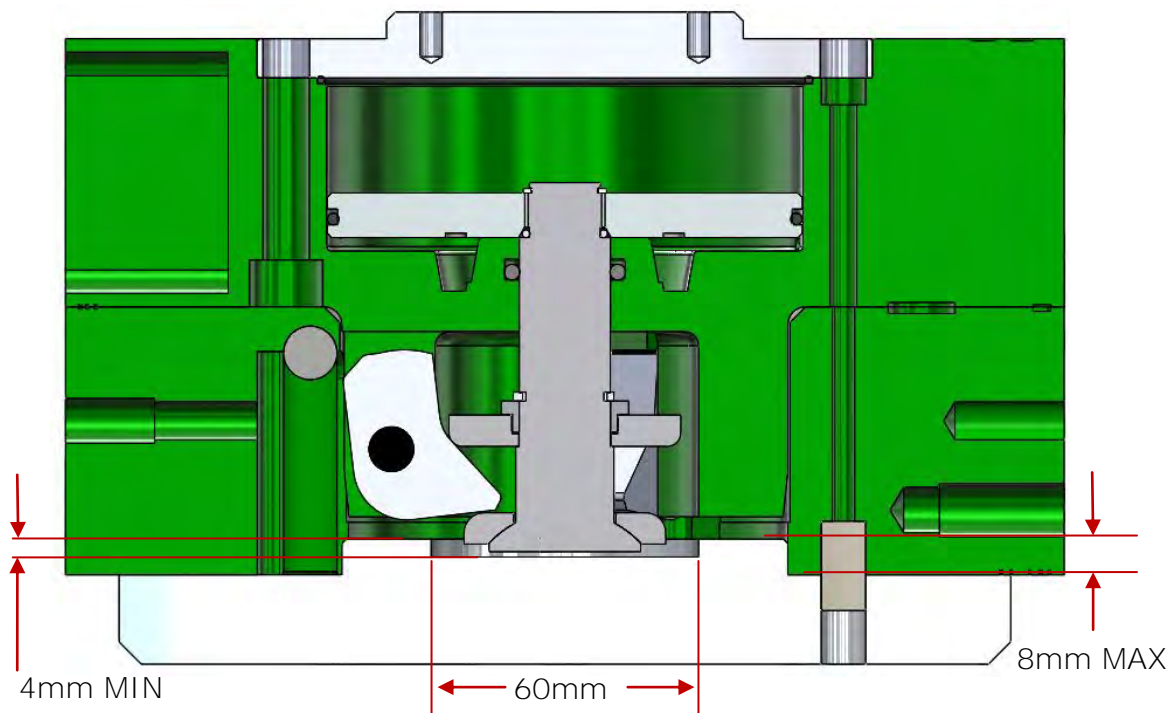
E125 Tool Adaptor and Tool Plate Installation
